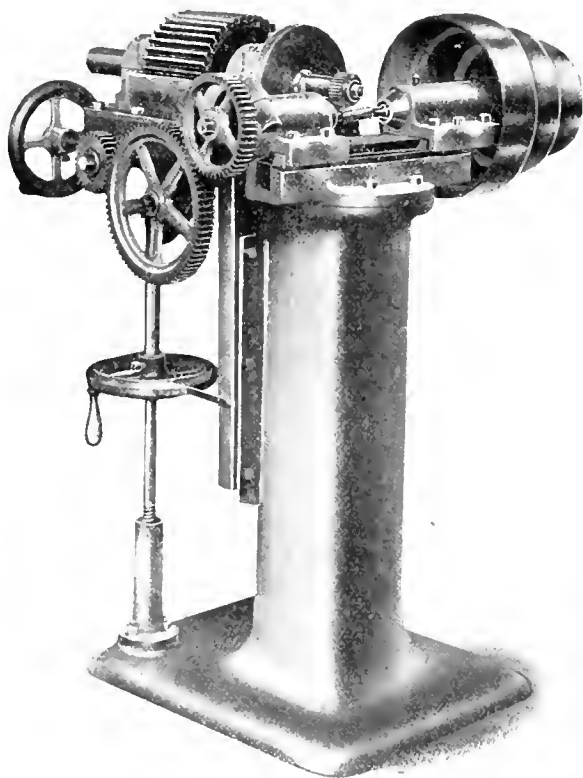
Moline Tool Co.'s Automatic Spur Gear Hobbing Machine.
